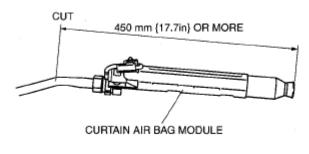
Identifying Curtain Air Bag Module & Nuts Courtesy of MAZDA MOTORS CORP.
